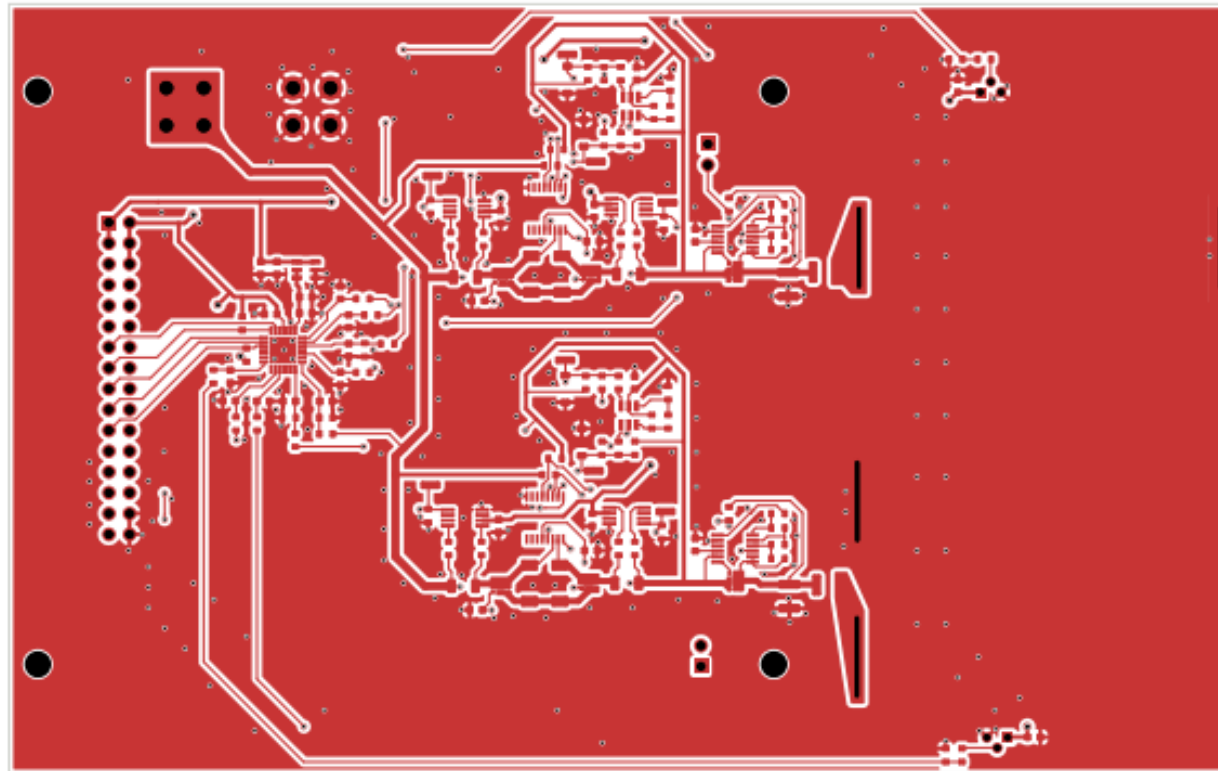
Batman PCB front layer. This layer has all the components used on this PCB.
